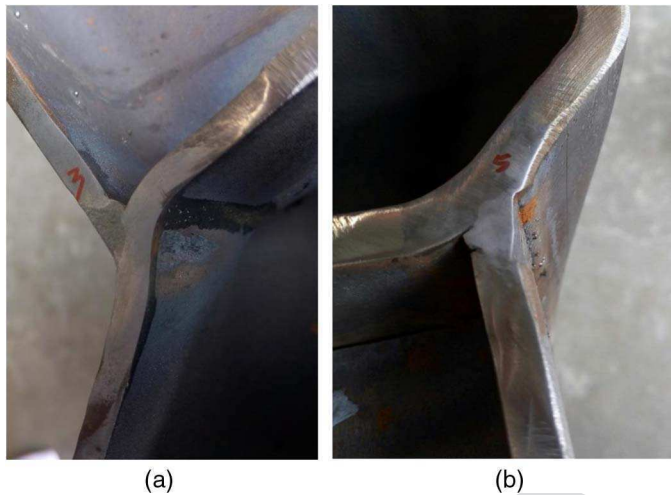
Macro etching of welds: (a) X3; (b) X5
